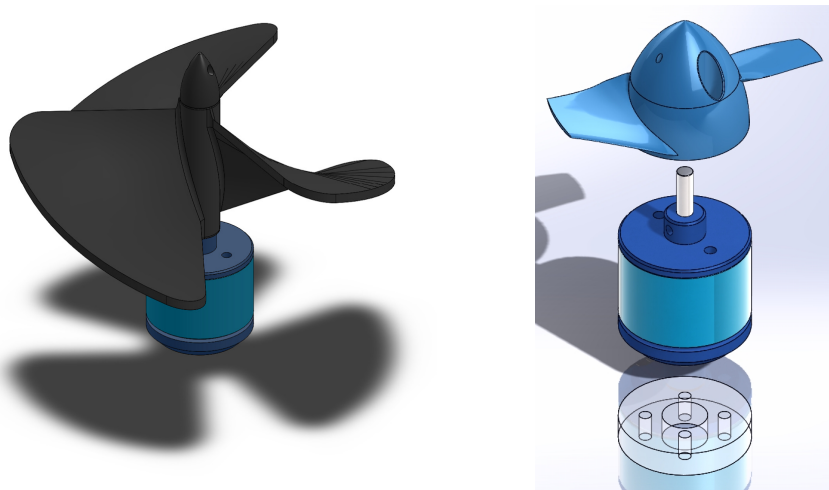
Revision 1 (left) and Revision 2 (right) of the the M100 thruster assembly. Screws not shown.
